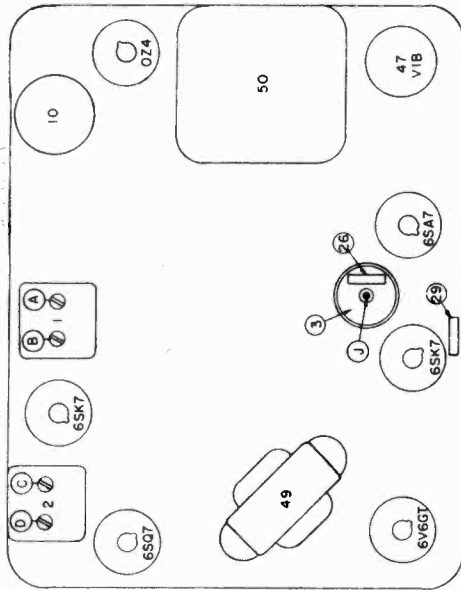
PARTS LAYOUT--DASH UNIT--Top View
